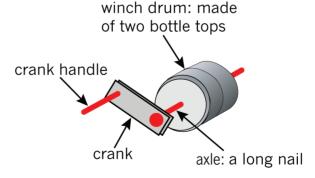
You can make a hand-driven winch drum by joining two milk-bottle tops together.
